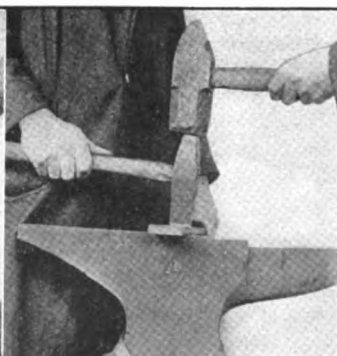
THE COLD CUTTER IS BEING USED ON FLAT STOCK
